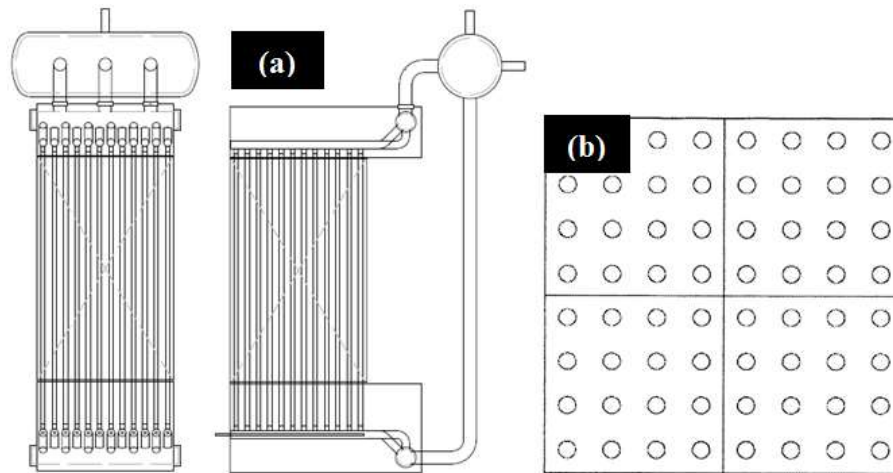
PCM heat exchanger: a) PCM heat exchanger sketch, b) Shell (PCM) & tubes [109, 110]
